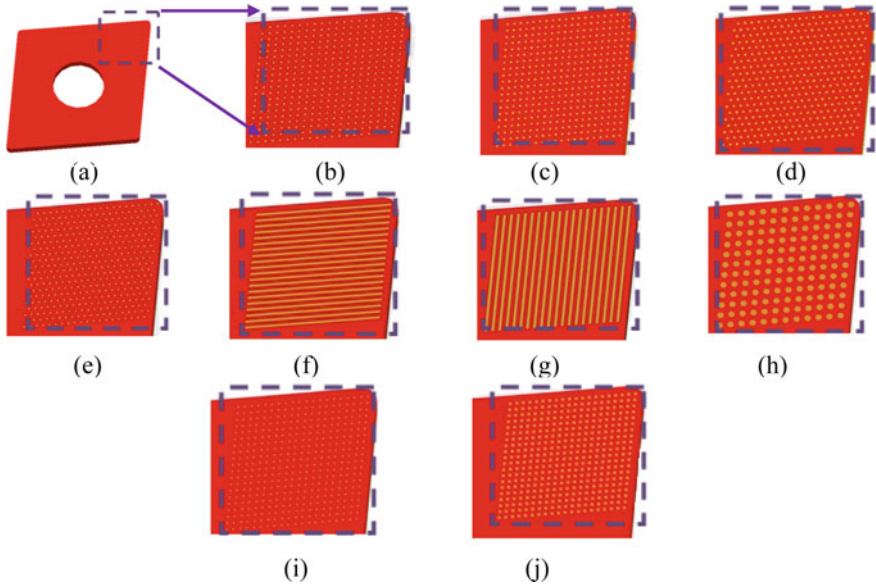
a Non-textured, b circular pitted 1, c circular pitted 2, d circular cross pitted 1, e circular cross pitted 2, f parallel grooved, g perpendicular grooved, h hexagonal pitted, i triangular pitted, j square pitted
